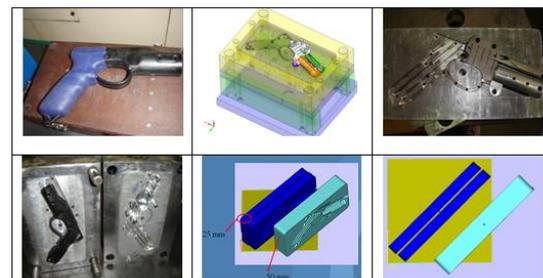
The tool design, manufacturing and optimising designs of the inserts
